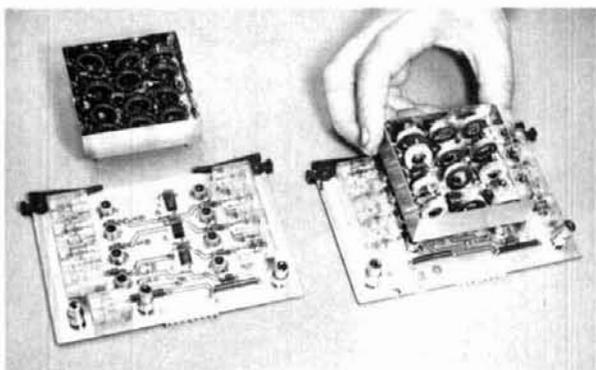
B. Filter assemblies are easily inserted into the pc boards which in turn plug into the transceiver.
